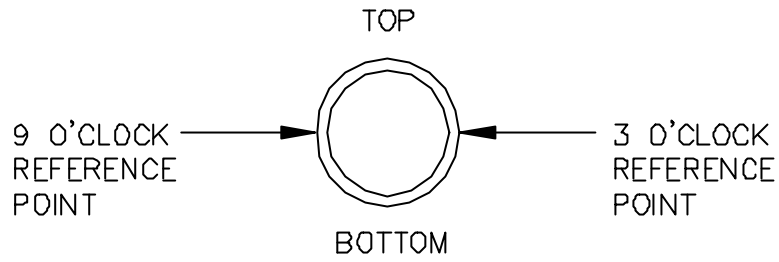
Establishing a 3 O'clock and 9 O'clock Reference (Z Method)
